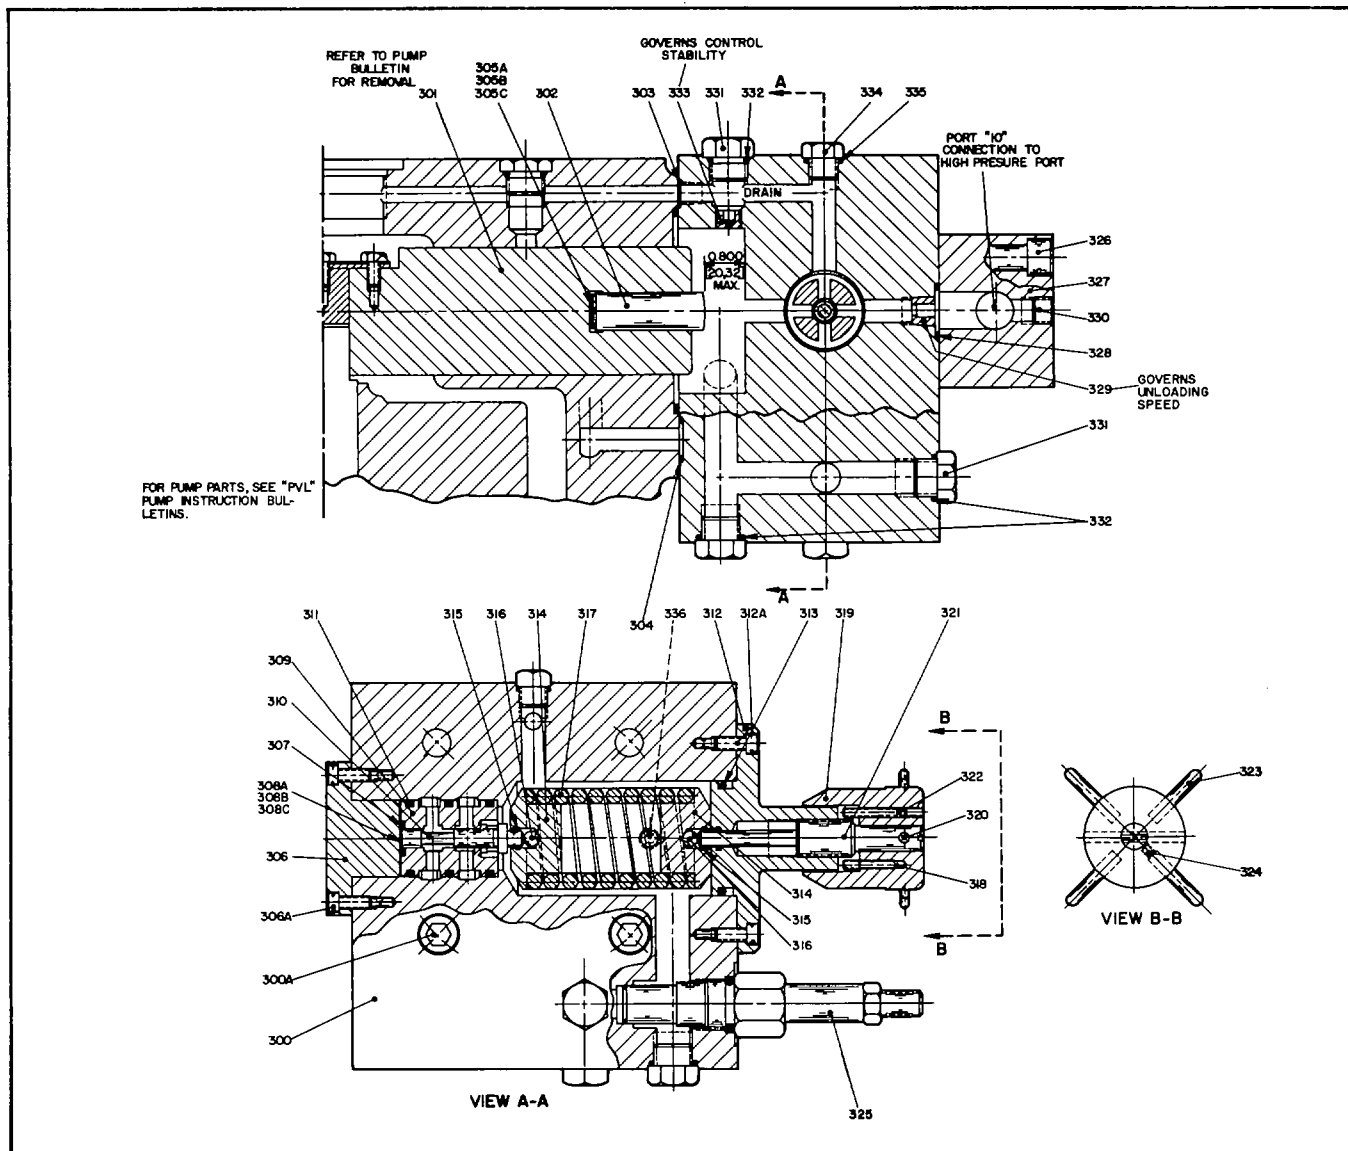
Parts Drawing, "P" Control (509757, sh.1)
